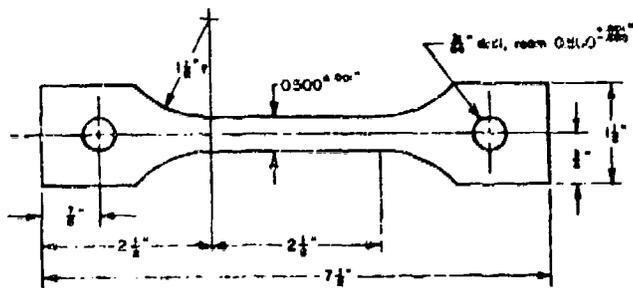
SHEET AND THIN-PLATE TENSILE SPECIMEN
